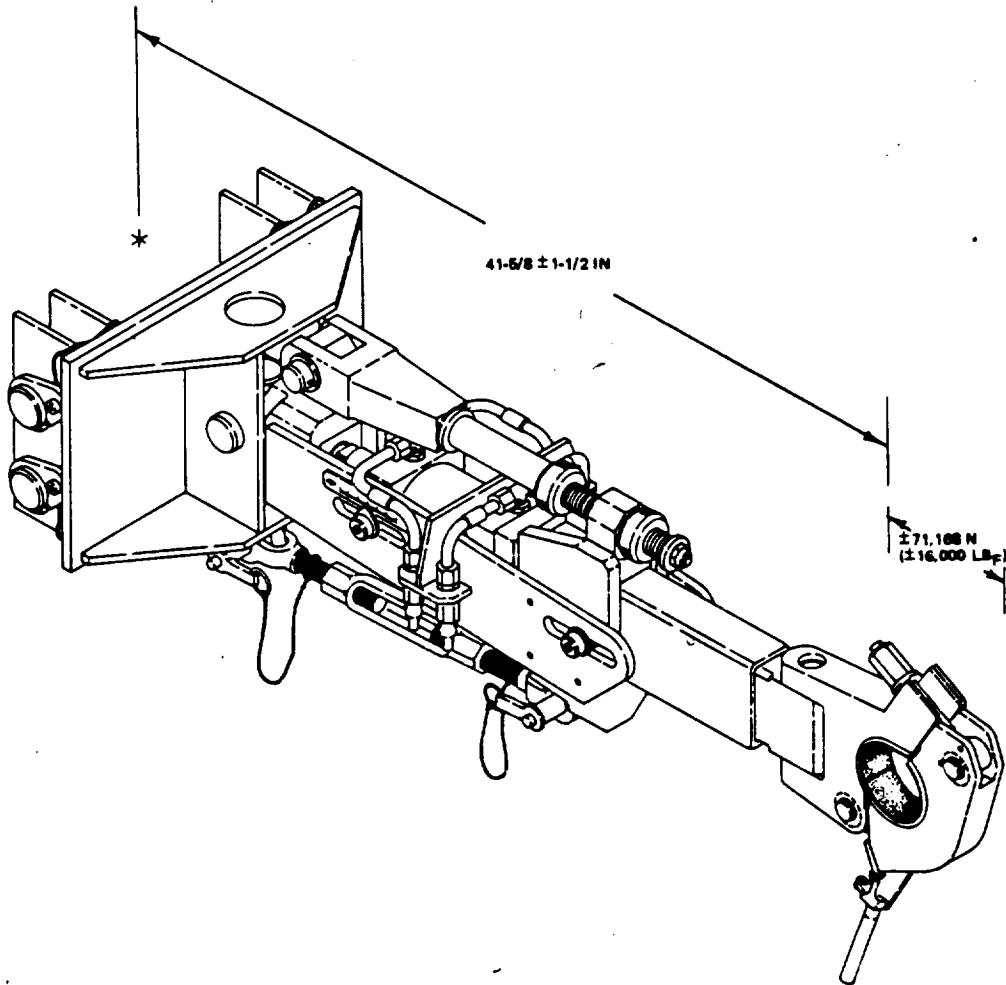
SECONDARY PAYLOAD SUPPORT FITTING MOUNTED TO SUPPORT BEAM
